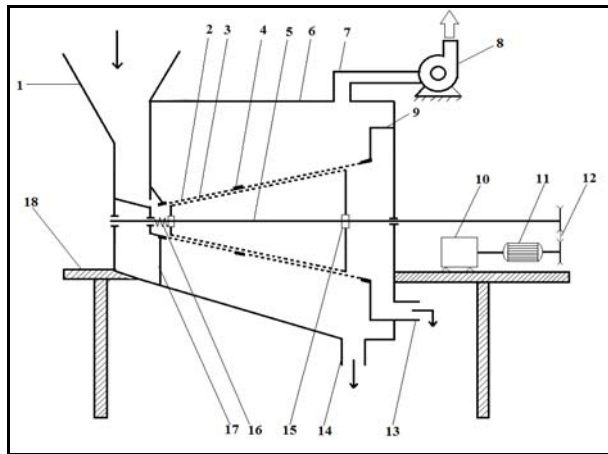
Technological scheme of the debranning machine: 1 - inlet; 2 - fixed braided wire jacket; 3 - rotative braided wire jacket; 4 - metal rings; 5 - shaft; 6 - casing; 7 - suction channel; 8 - fan; 9 - evacuation area for debranned seeds; 10 - speed converter; 11 - electric motor; 12 - belt transmission; 13 - debranned seeds outlet; 14 - impurities outlet; 15 - mounting flange; 16 - helical spring; 17 - fixing system for the outer jacket; 18 - frame.
